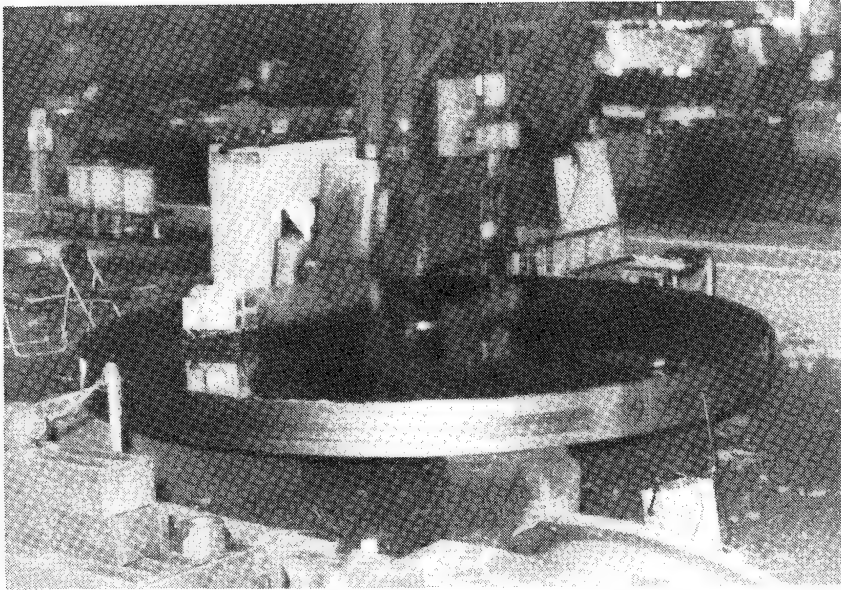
NTF fan disk machined for ultrasonic inspection.
